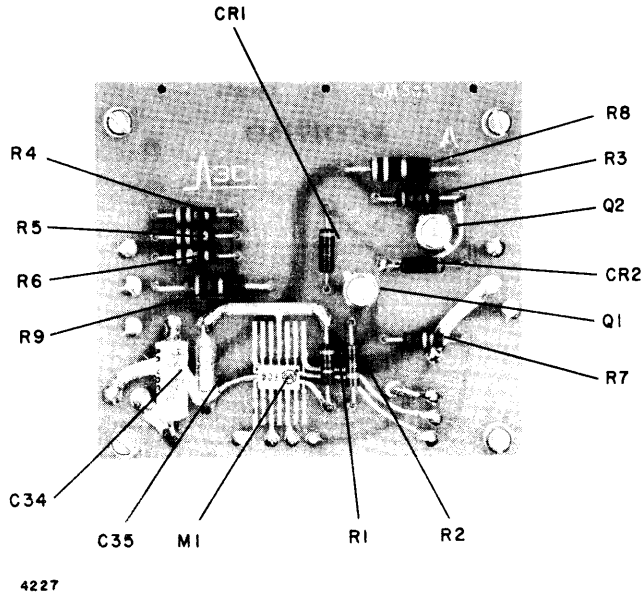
Timing Distributor PAC, Model CM-490, Parts Locations
